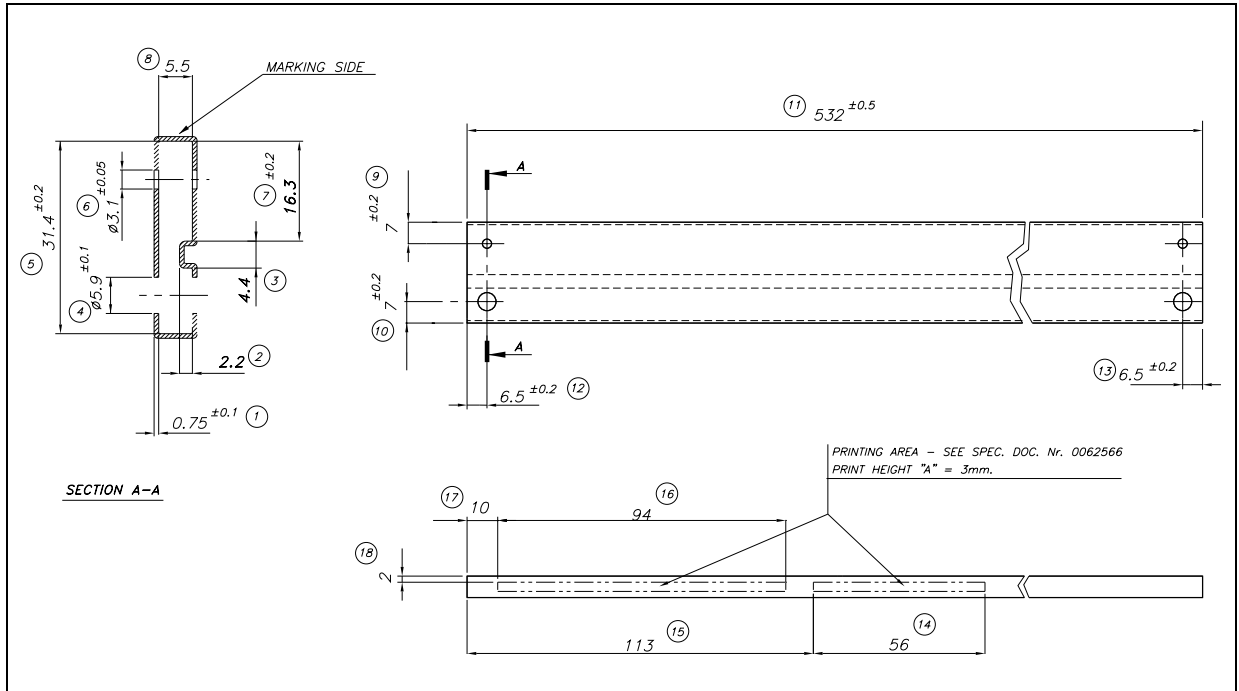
Drawing dimension tube for TO-220 Single Gauge (mm.)
